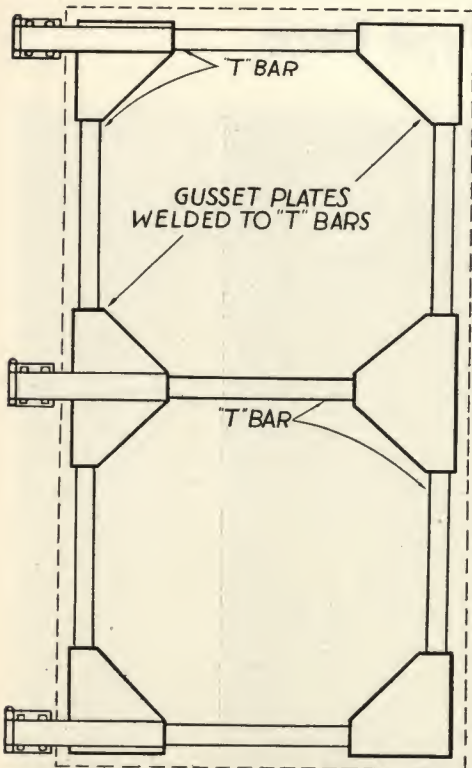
Steel frame of a No. 448 Swinging Door. Showing hinges attached to steel frame
